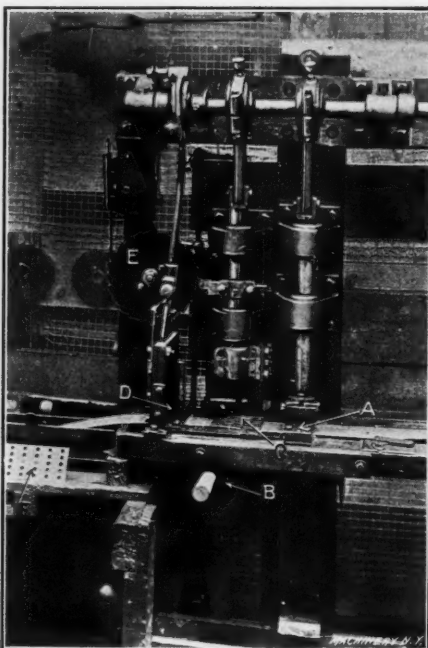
The Perforating, Feeding and Shearing Mechanism of the Automatic Machine
